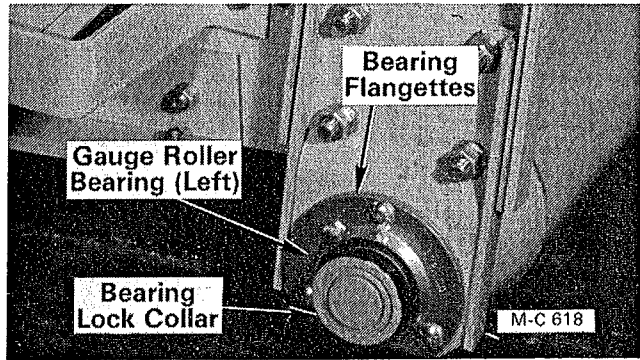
Gauge Roller Brg. - Below S/N 47198
